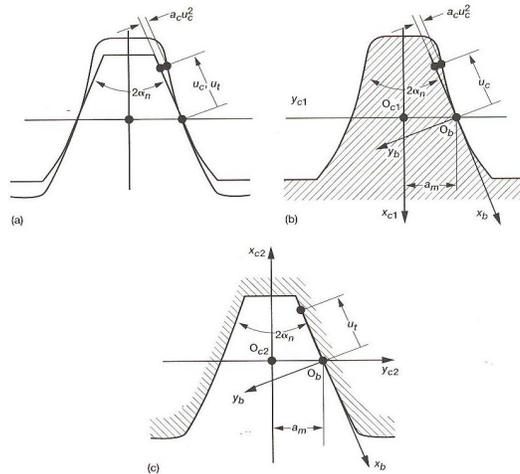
Normal section of rack-cutters. (a) Rack-cutters for gear and pinion generation (b) Pinion rack-cutter (c) Gear rack-cutter.
